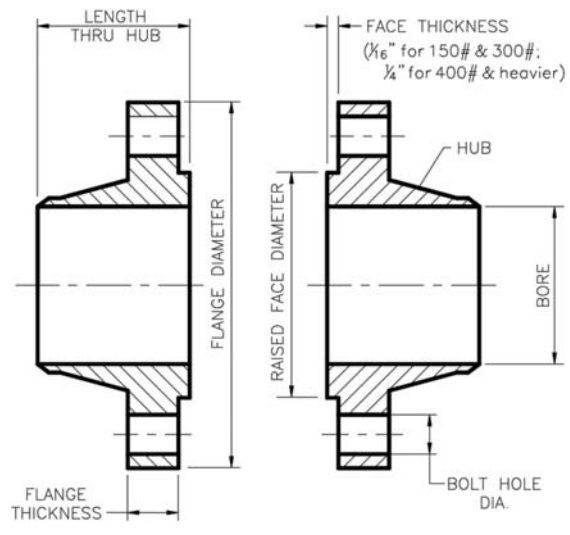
Sectional view of raised face welding neck flange.
